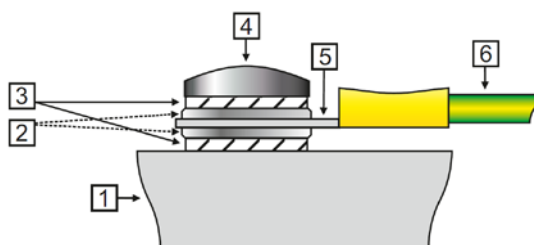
Recommended mounting of the protective earth conductor (profile view)
